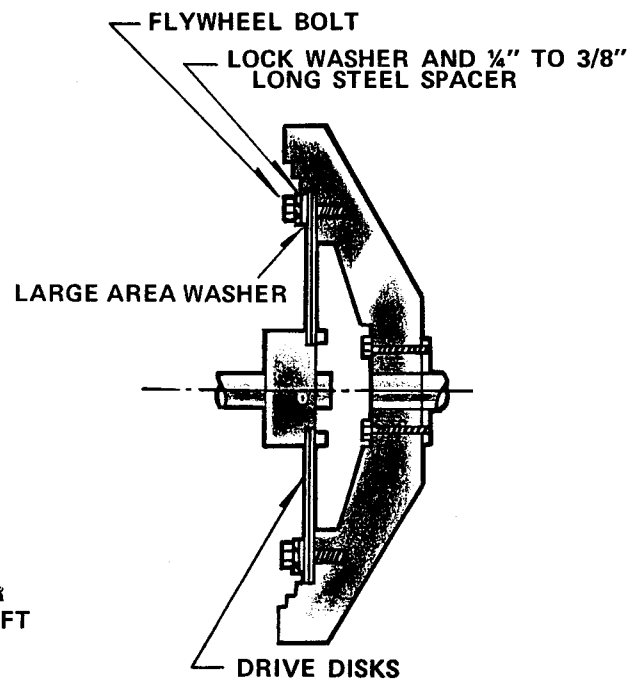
CROSS SECTIONAL VIEW — DRIVE DISKS AND FLYWHEEL
